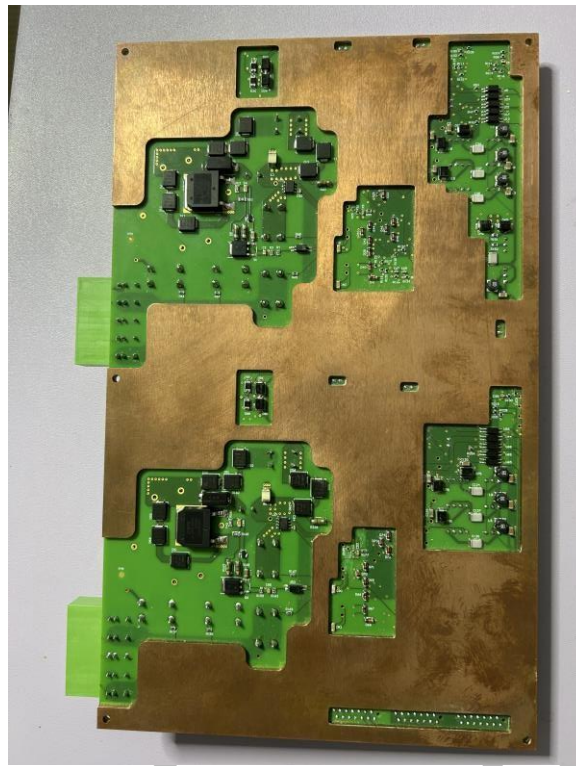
Bottom View on SSPC with Copper Based 2mm IMS-PCB
